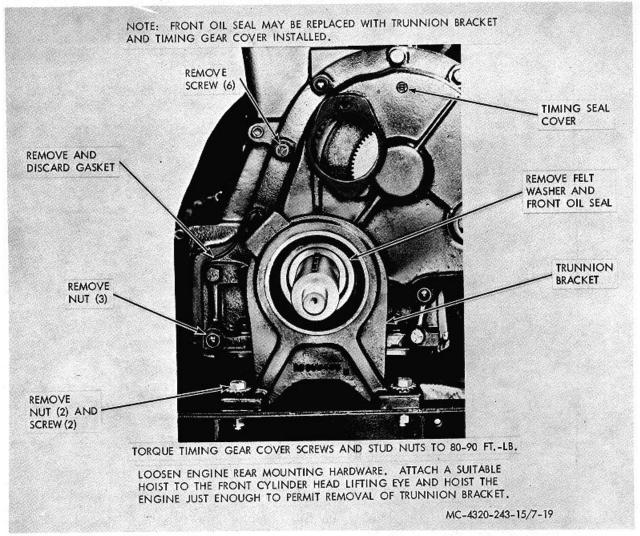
Trunnion bracket, timing gear cover and front oil seal, removal and installation.
